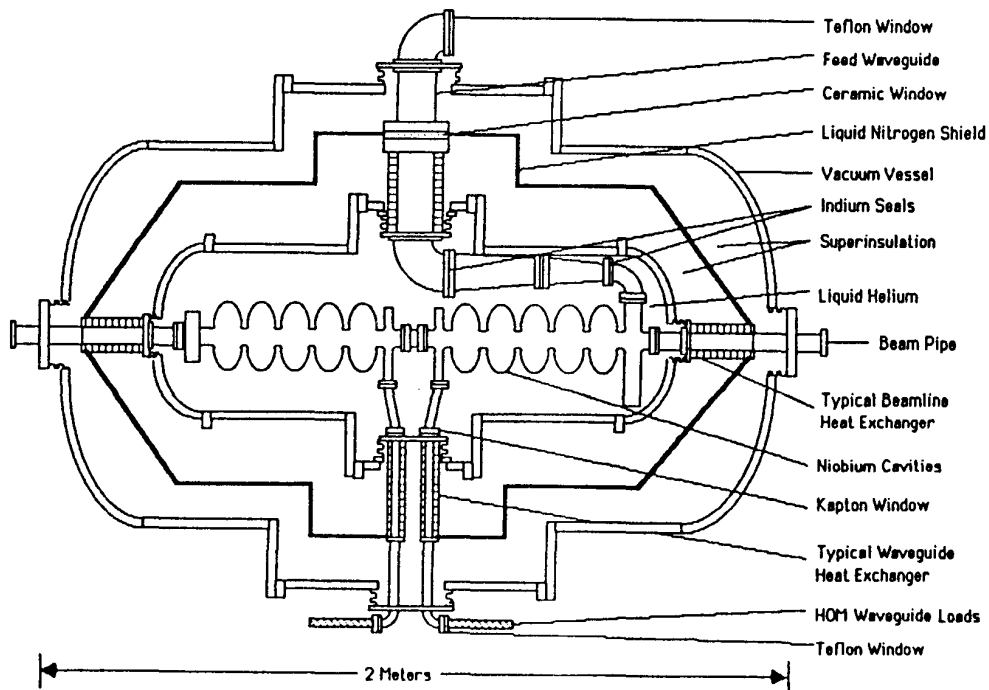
Cross section of 1984 CORNELL beam test cryostat
